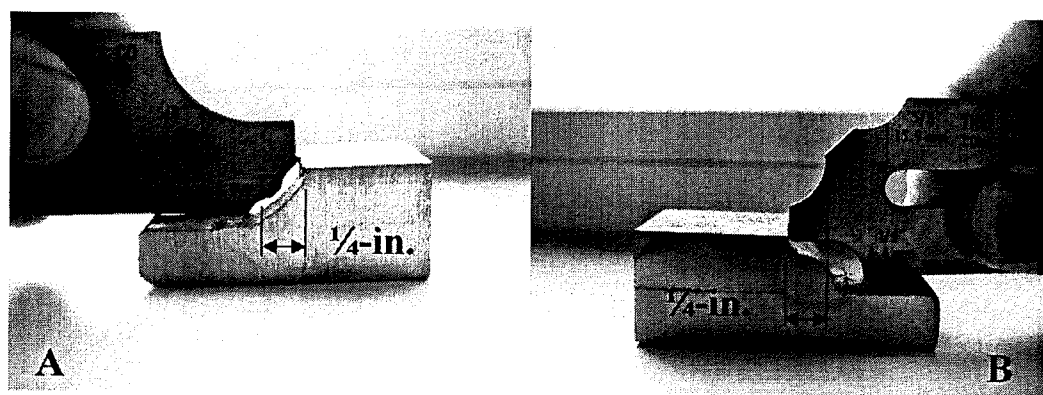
Fillet Weld Gage—Concave Measurement (A), Convex Measurement (B)
